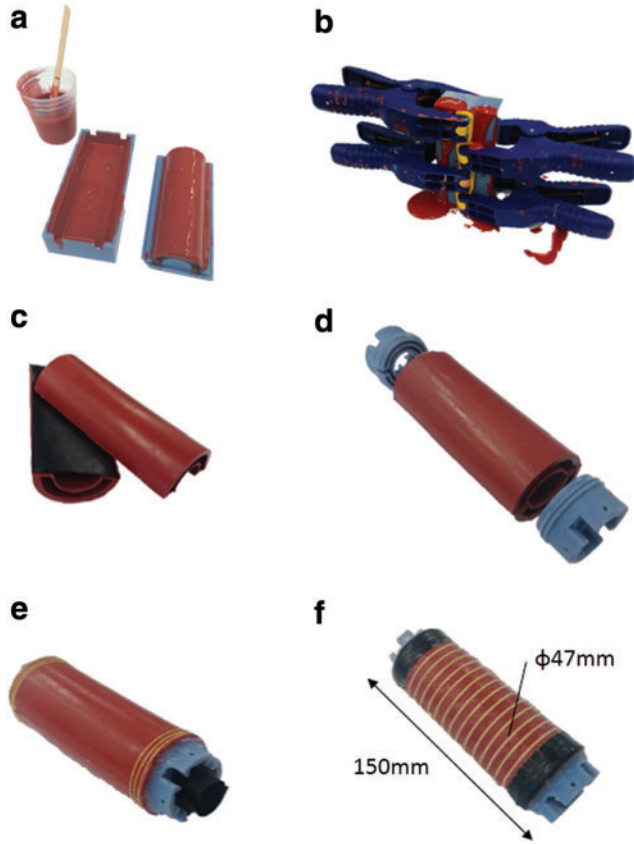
Fabrication process of the bending module. (a) Liquid silicone rubber (M4601 by Wacker Chemical) is poured in both halves of 3D-printed molds. (b) The two mold halves are clamped together, and then, silicone rubber is formed into a half-cylindrical shape. (c) Nylon sheet is put between two half cylinders and these are assembled by silicone adhesive. (d) Fabricated silicone cylinders and 3D-printed end connectors are combined with silicone adhesive. (e) Both ends are tightened by fibers and reinforced by nylon sheets outside and inside, respectively. (f) Kevlar fibers are attached with a circular arrangement of fibers and the cylinder is coated with silicone. Color images available online at www.liebertpub.com/soro
